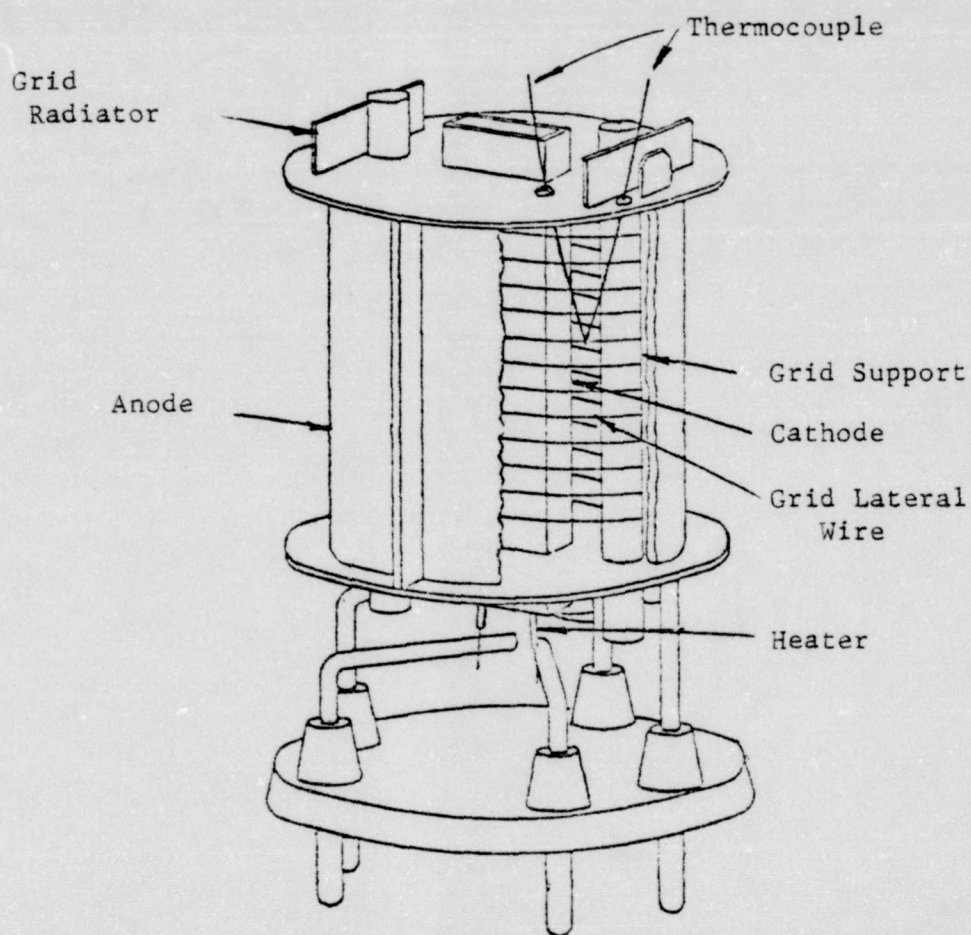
Radio Receiving Tube With Thermocouple Welded to Grid Lateral Wire
